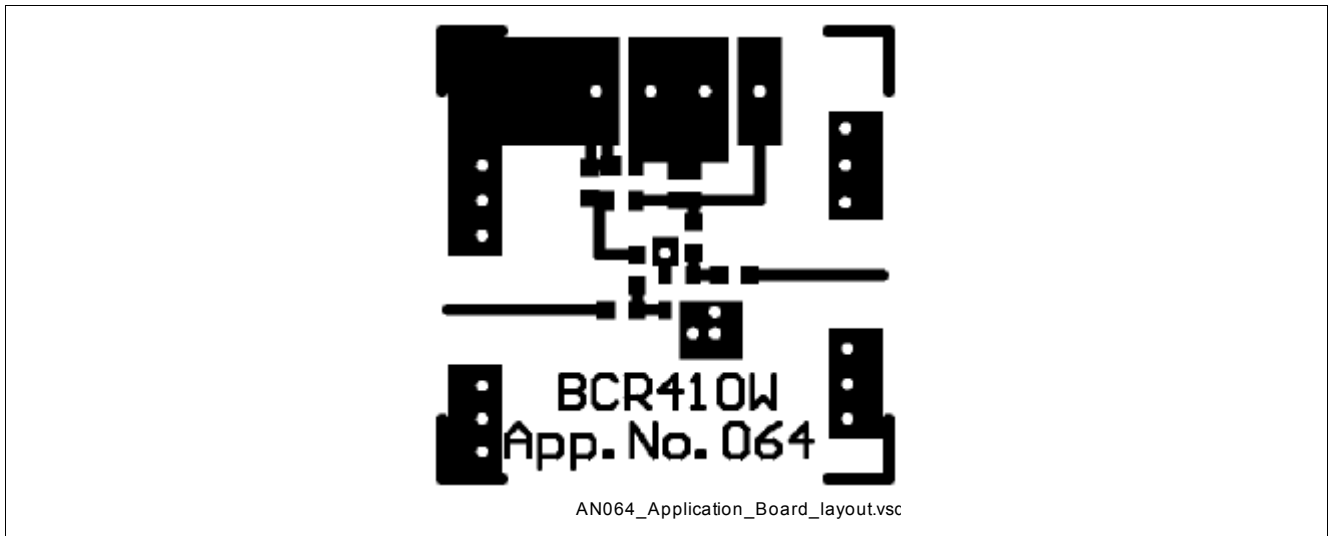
Application Board Layout (actual size: 20 mm x 20 mm)
